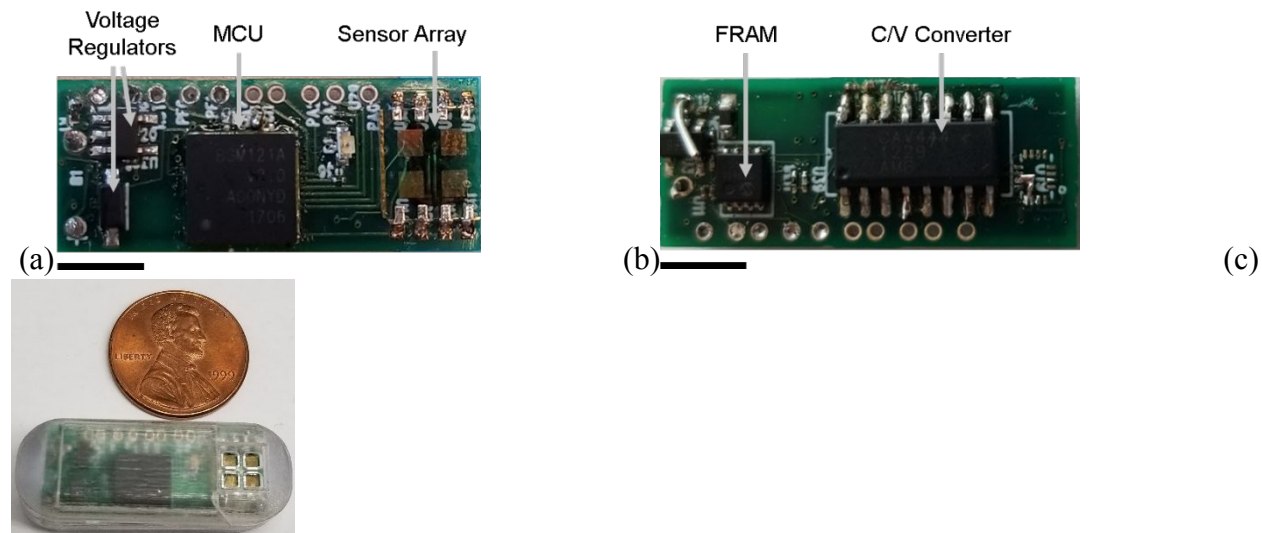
(a) Top and (b) bottom views of sensor PCB assembly (SPA), and (c) photograph of assembled capsule. Scale bar = 5 mm.
